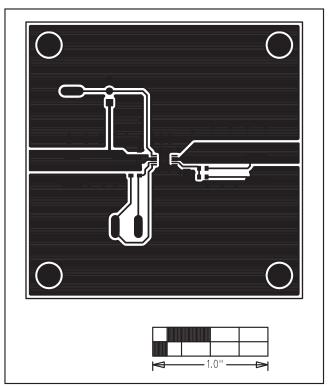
MAX8517 EV Kit PCB Layout—Component Side
